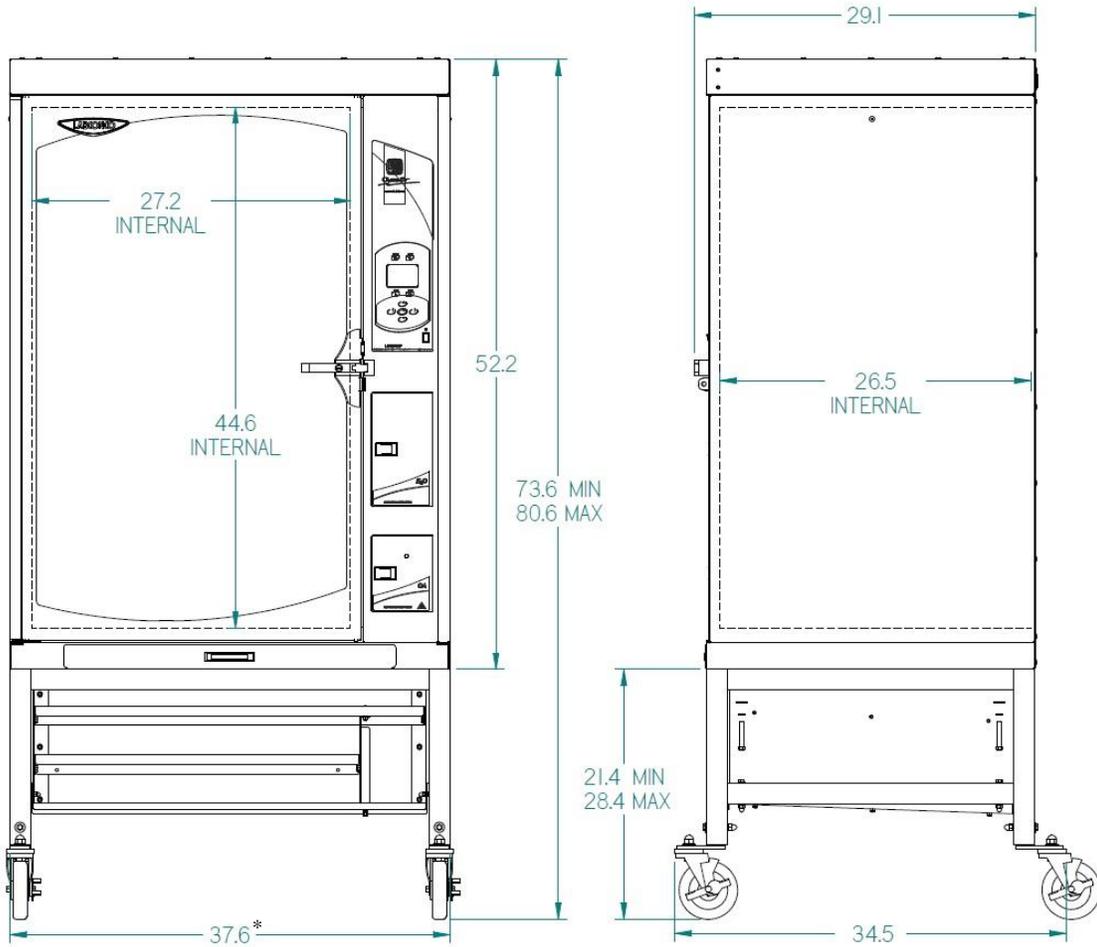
indicates the product dimensions. All dimensions shown in inches.
